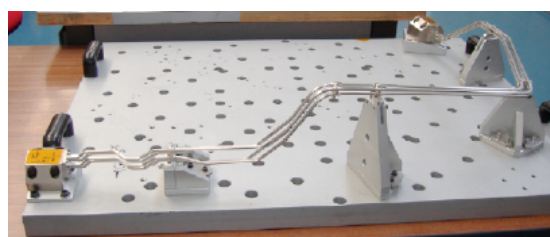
70 GHz Cu WG mounted over the vibration fixture.
